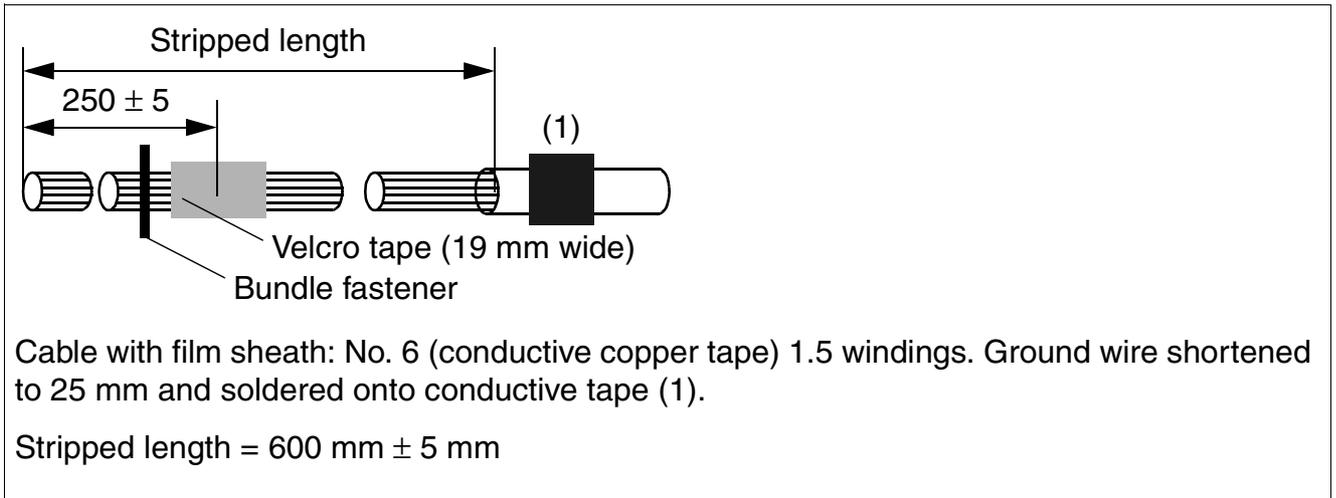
Stripping the Open-End Cable for the S₀ Patch Panel
